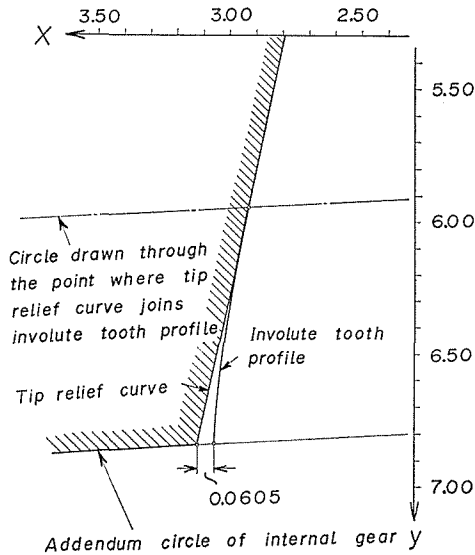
Tooth profile of internal gear having the tip relief generated by radial flank of pinion cutter
